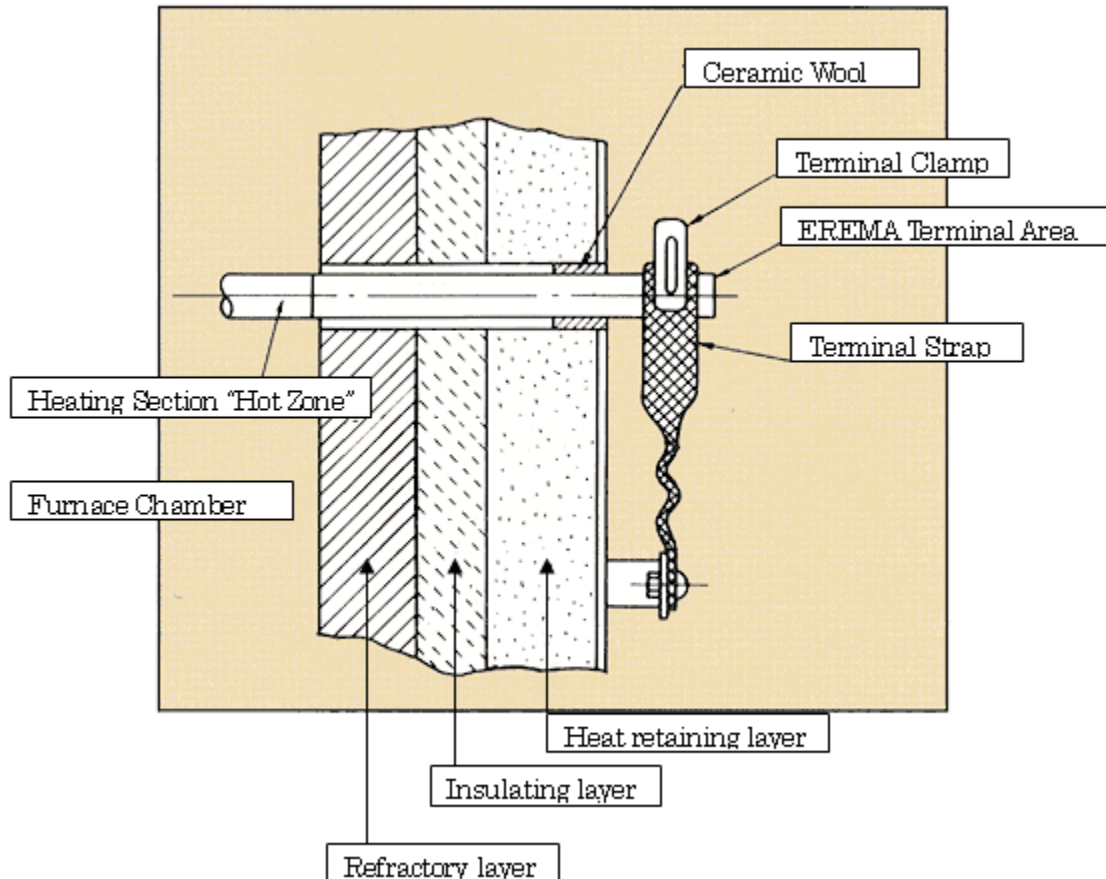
EREMA INSTALLATION WITH A TERMINAL CLAMP
